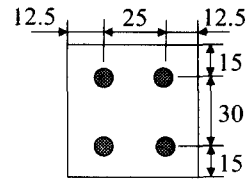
Geometry of auto seat belt anchor specimens (unit: mm)
